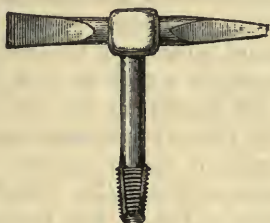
HANDLED GAS-BURNER TAP WITH REAMER AND TURNSCREW.
